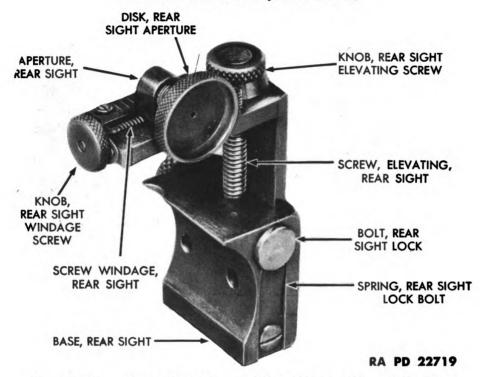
Rear Sight Assembly of U.S. Rifle, Cal. .22, M2 — Left Rear View
